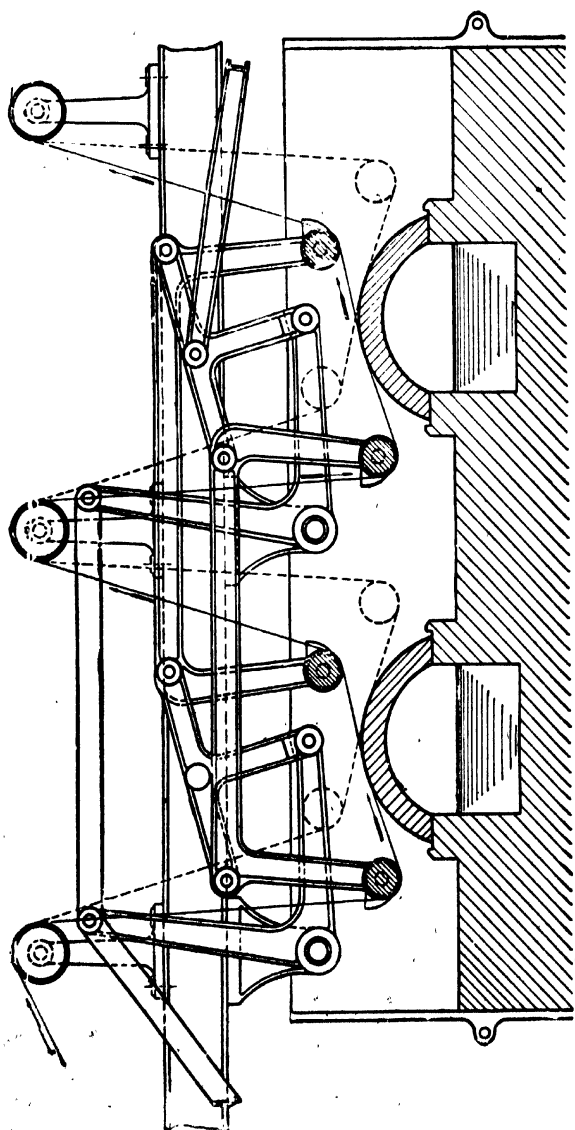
Hot-plate singeing machine, with mechanical arrangement to prevent too long contact and scorching of fabrics.
